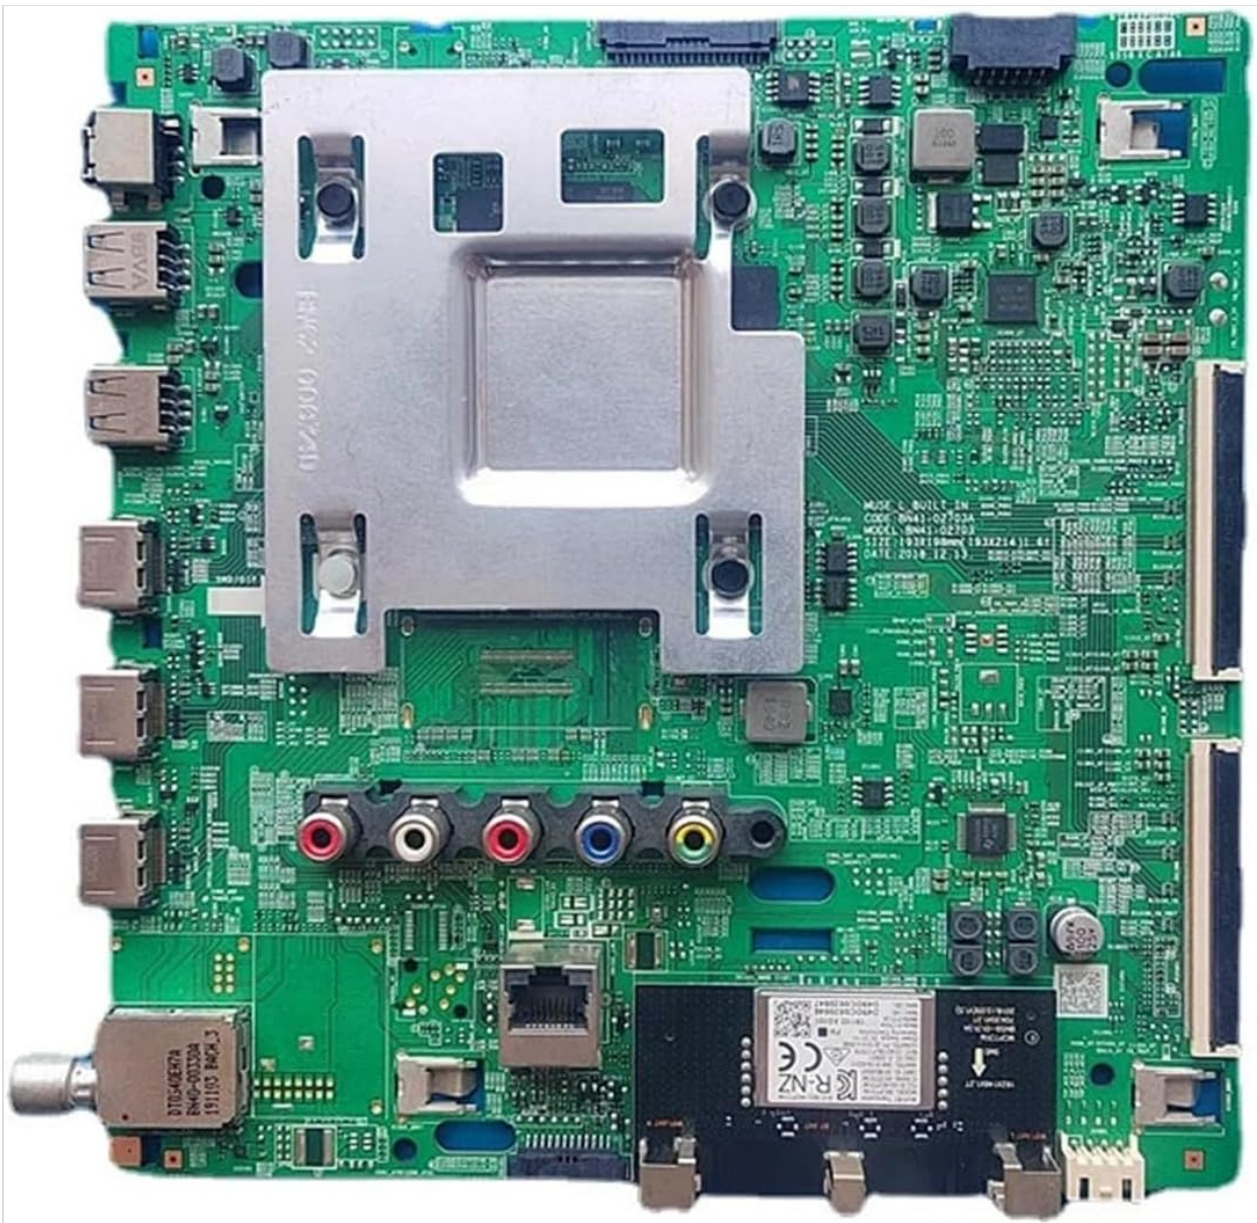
Rear view of the main board, illustrating the circuit board layout.
